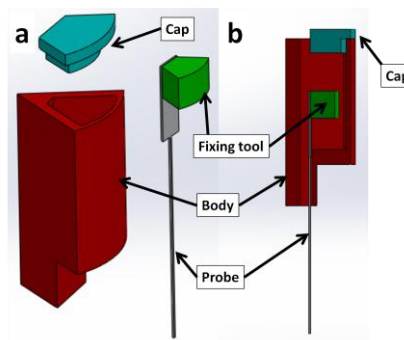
CAD designs of microdrive. (a) Exploded view (b) Cross sectional plan
